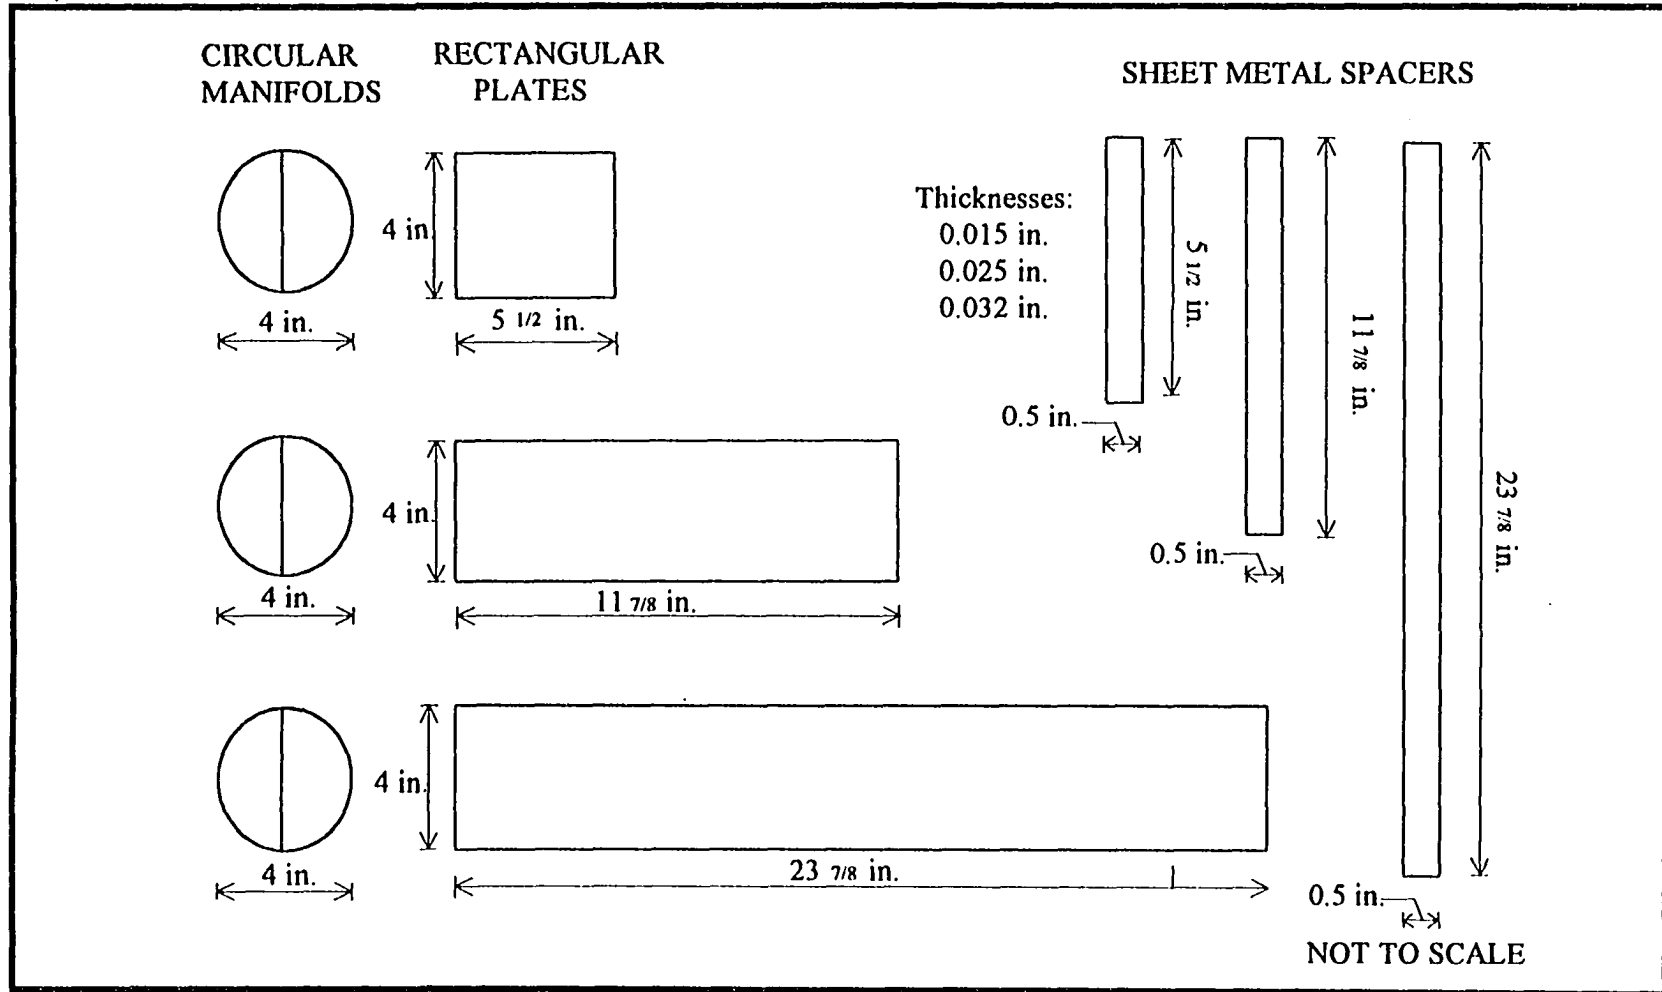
Dimensions of Plates, Circular Manifolds, and Sheet Metal Spacers for Linear Control Devices.
